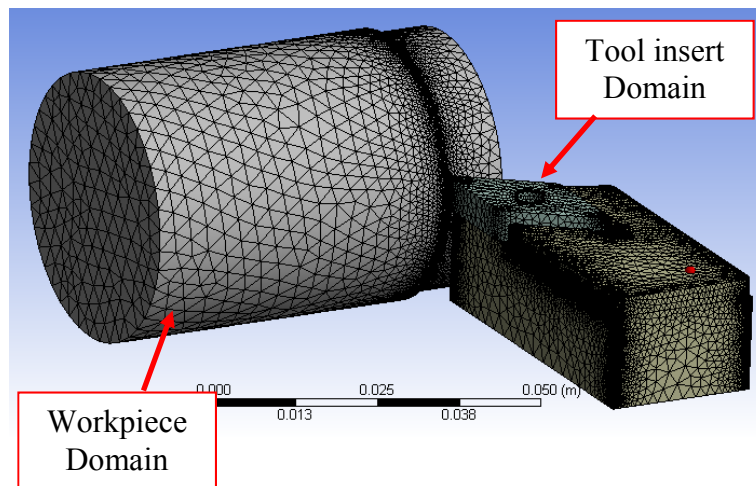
Employed mesh on tool insert, tool holder and workpiece domain for numerical analysis
